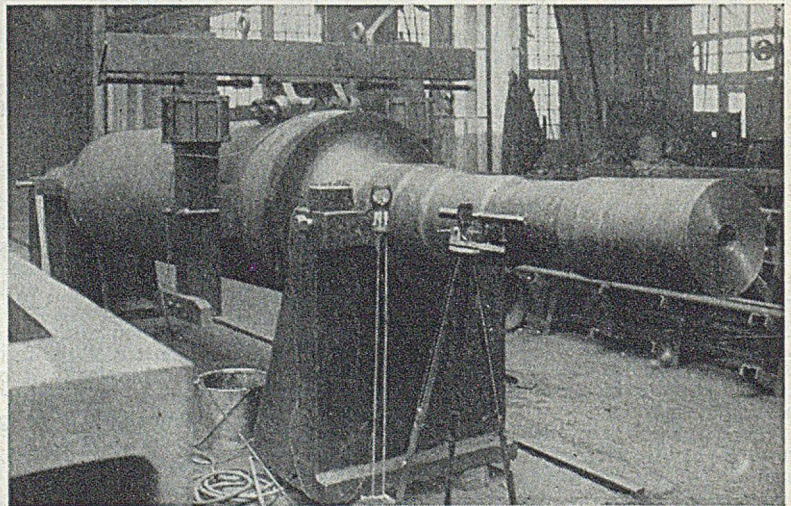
MAGNETIC TESTING OF LARGE ROTOR FORGING.
